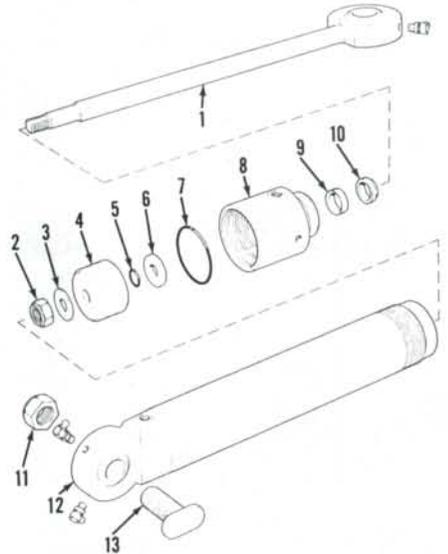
Exploded view of steering cylinder used on 1490 models, some 1690 models and early 1394, 1494 and 1594 models equipped with Carraro front drive axle.
